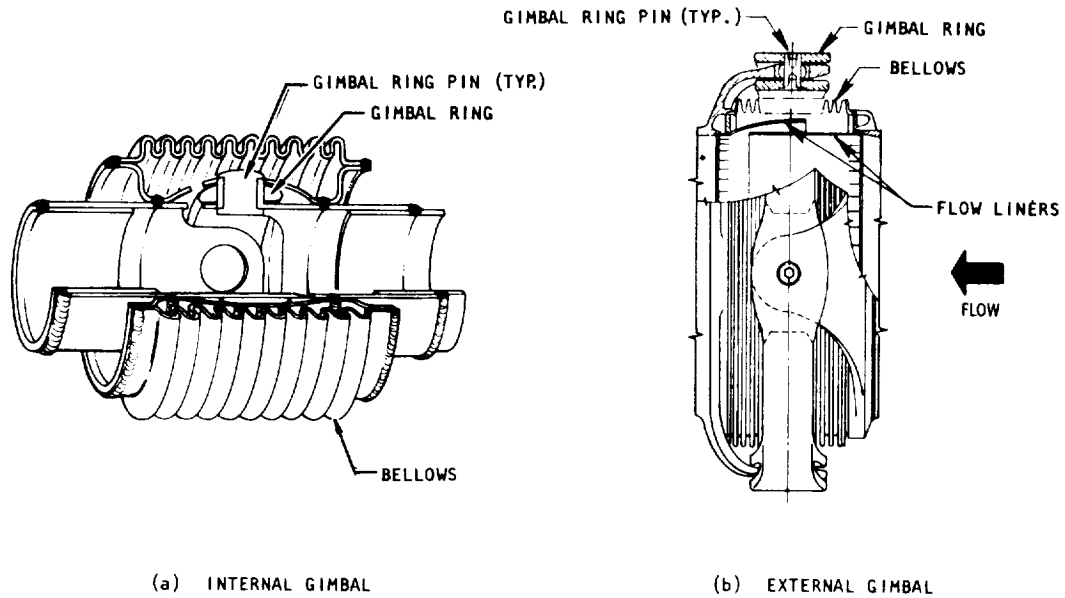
Internal and external mounting of gimbal rings with double-shear clevis pins.
